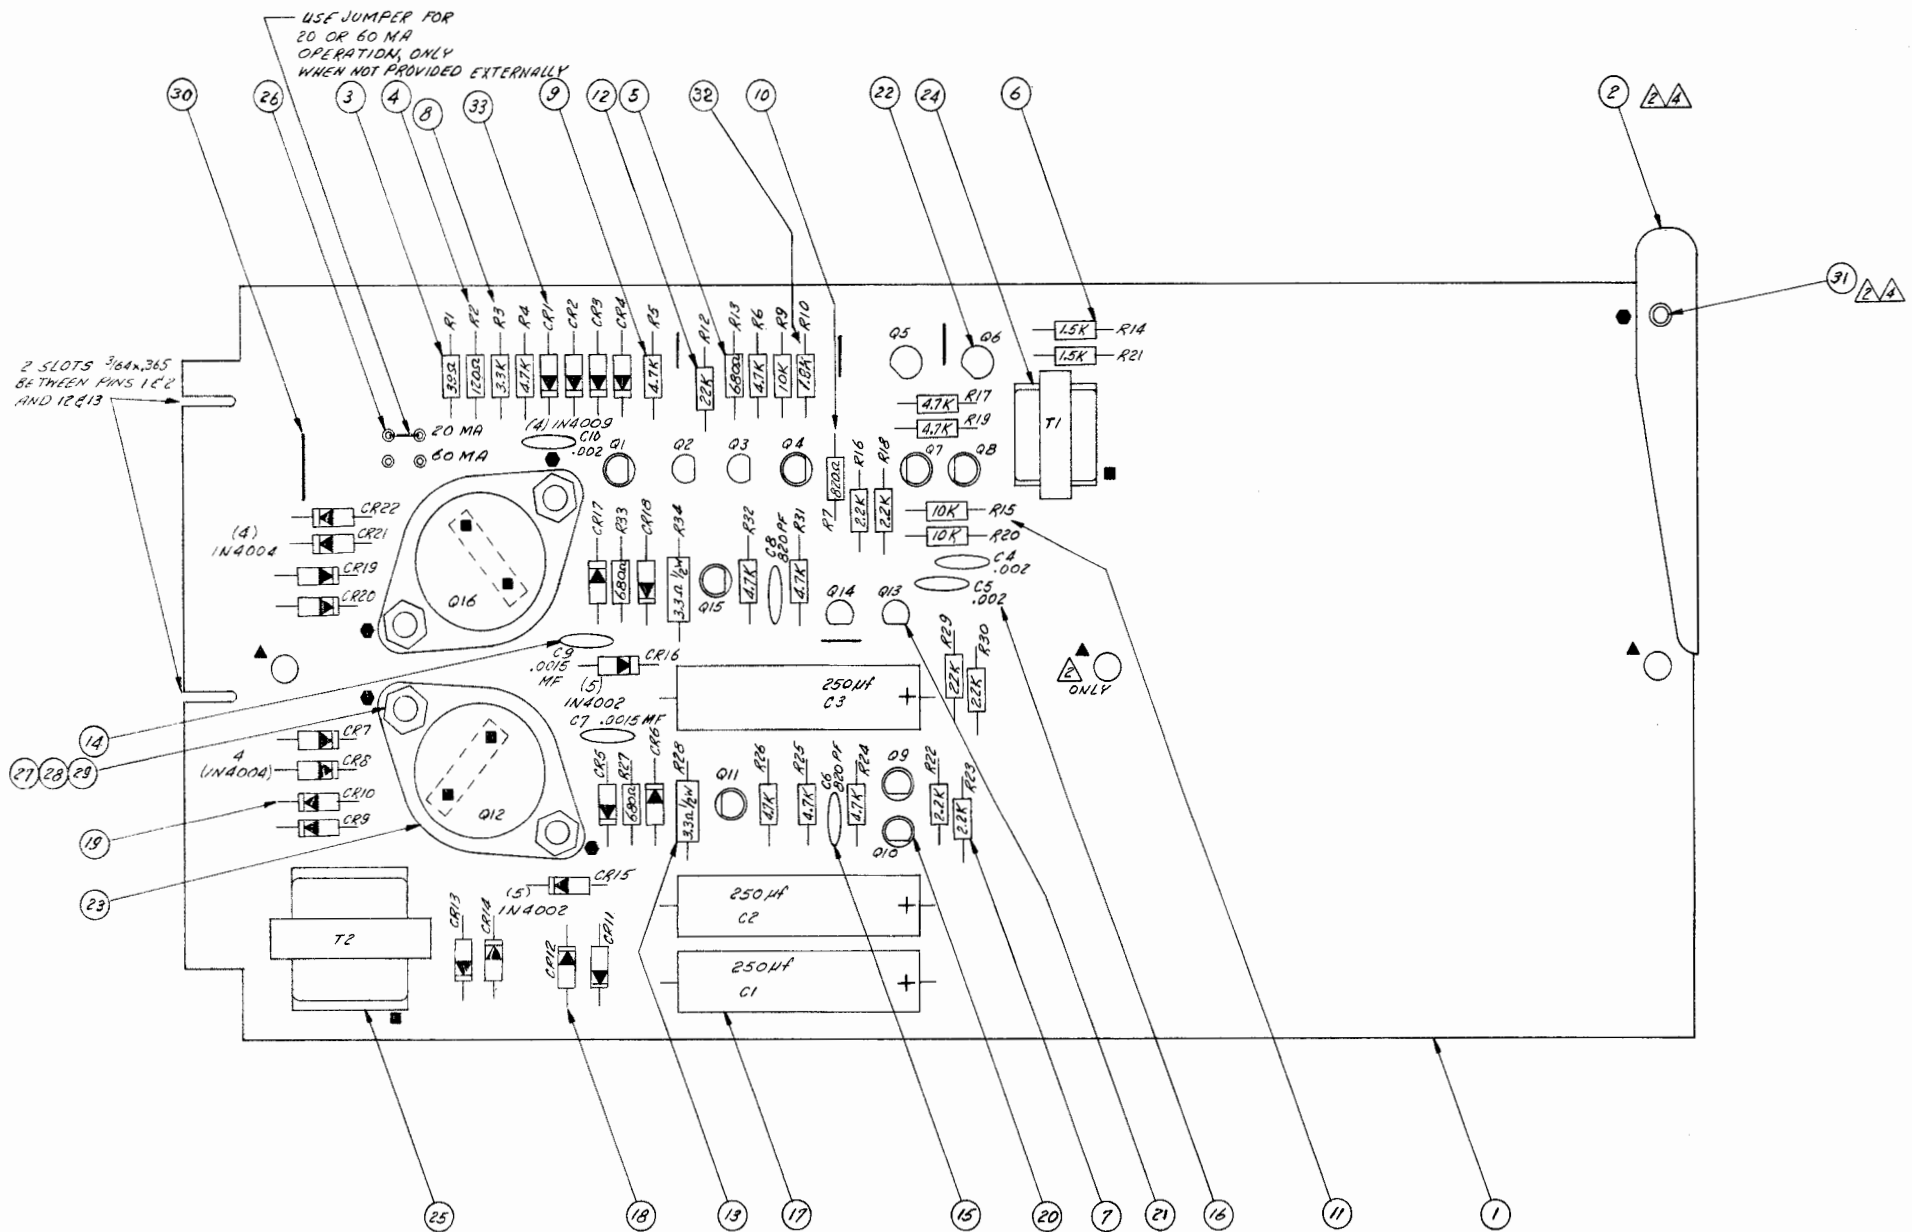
P.C. Board Assembly, Matrix Circuits
